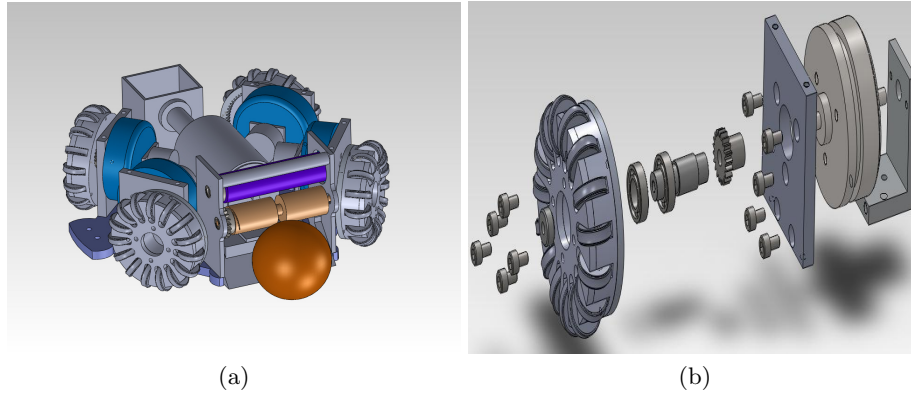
(a) Technical drawing of BRocks robots , (b) The Wheel's mounting system
